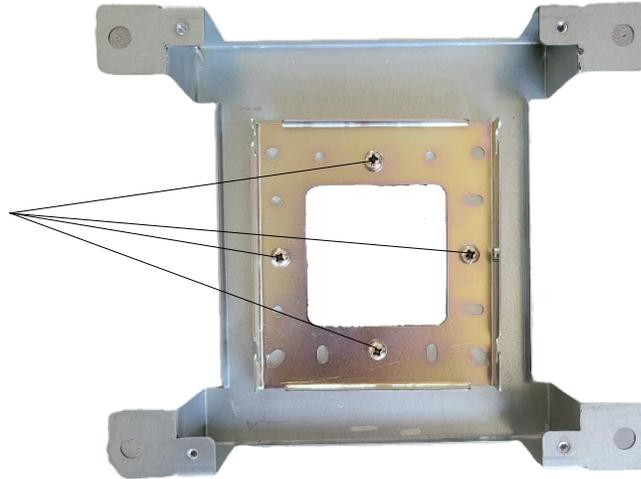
APV3-BDA - Mounting Standard Mounting Bracket to Flush Mount Bracket
